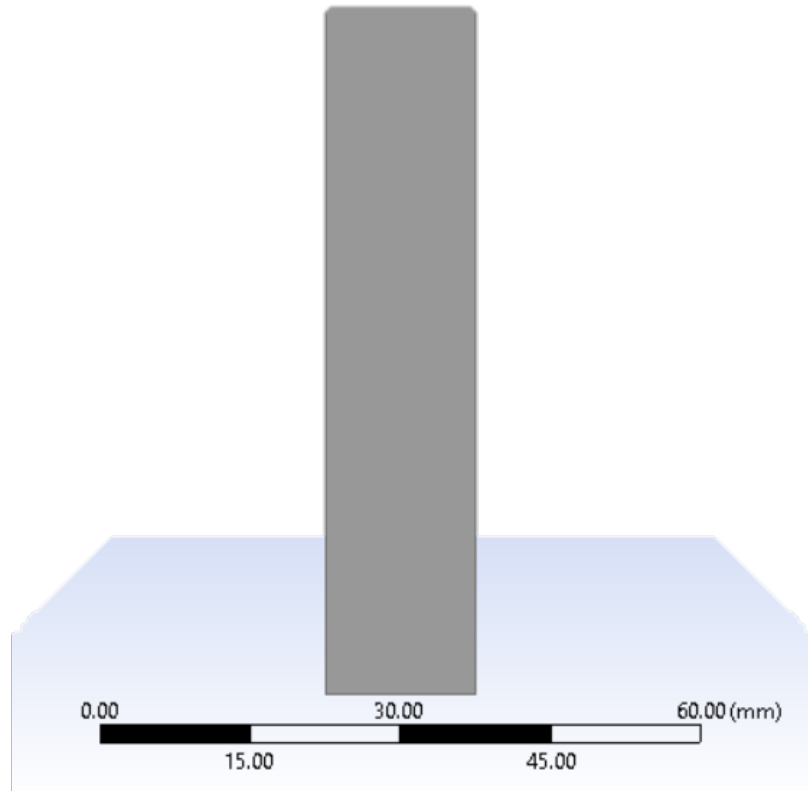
Geometry representation of sample with nominal print dimensions using a surface element in the ANSYS geometry modeler.
